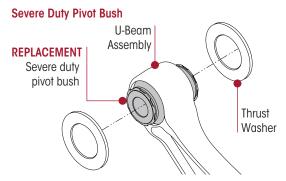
Severe-duty Pivot Bush Thrust Washer Assembly
